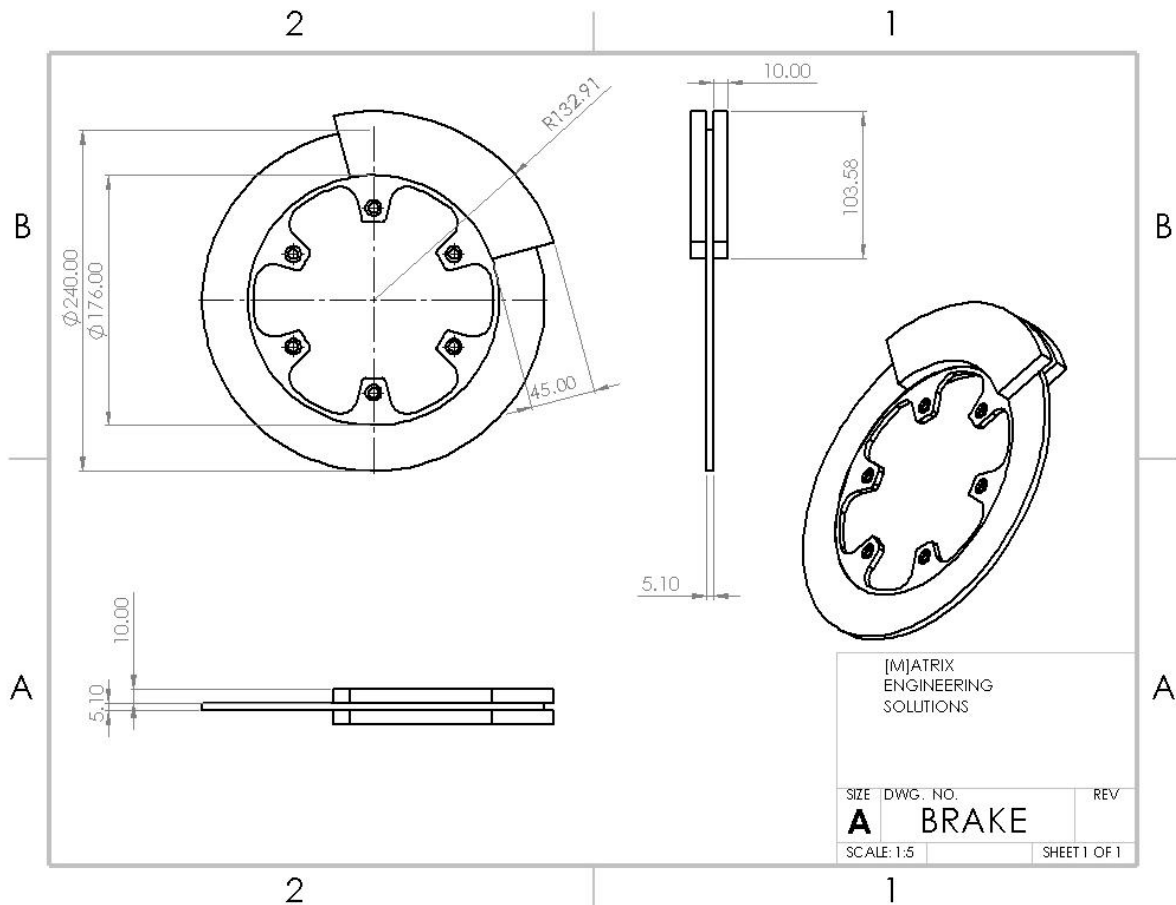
Detailed drawing of Disc Brake model.
